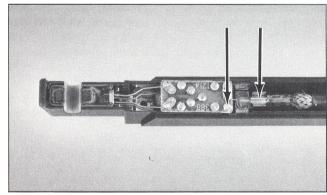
Arrows point to the two points to be unsoldered in the P6022 when removing the cable, circuit board and transformer.
